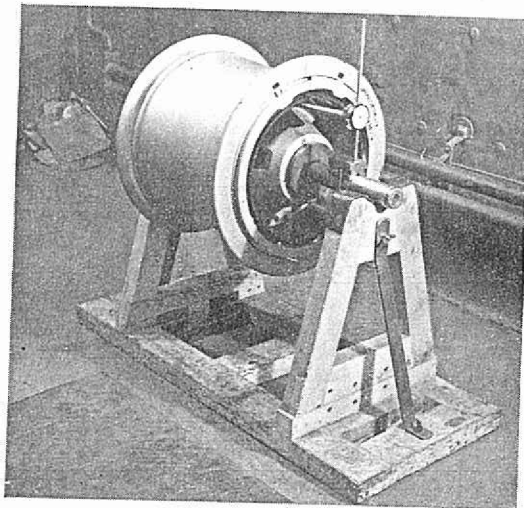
Wheel rotated on dummy shaft, measuring equipment stationary
